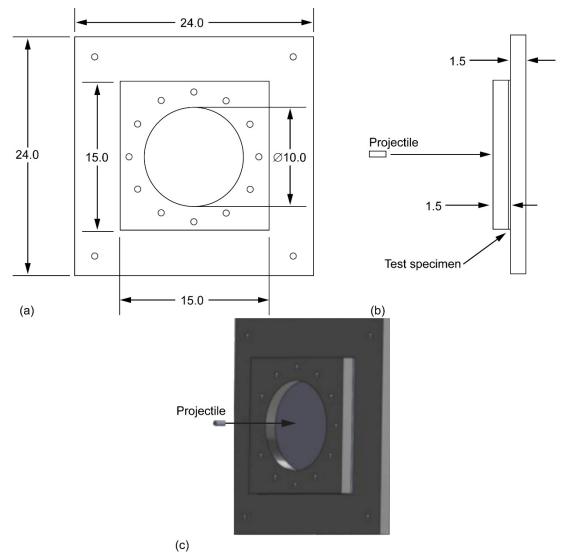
Test fixture assembly. Dimensions in inches. (a) Front view. (b) Side view. (c) Clamp fixture assembly.
